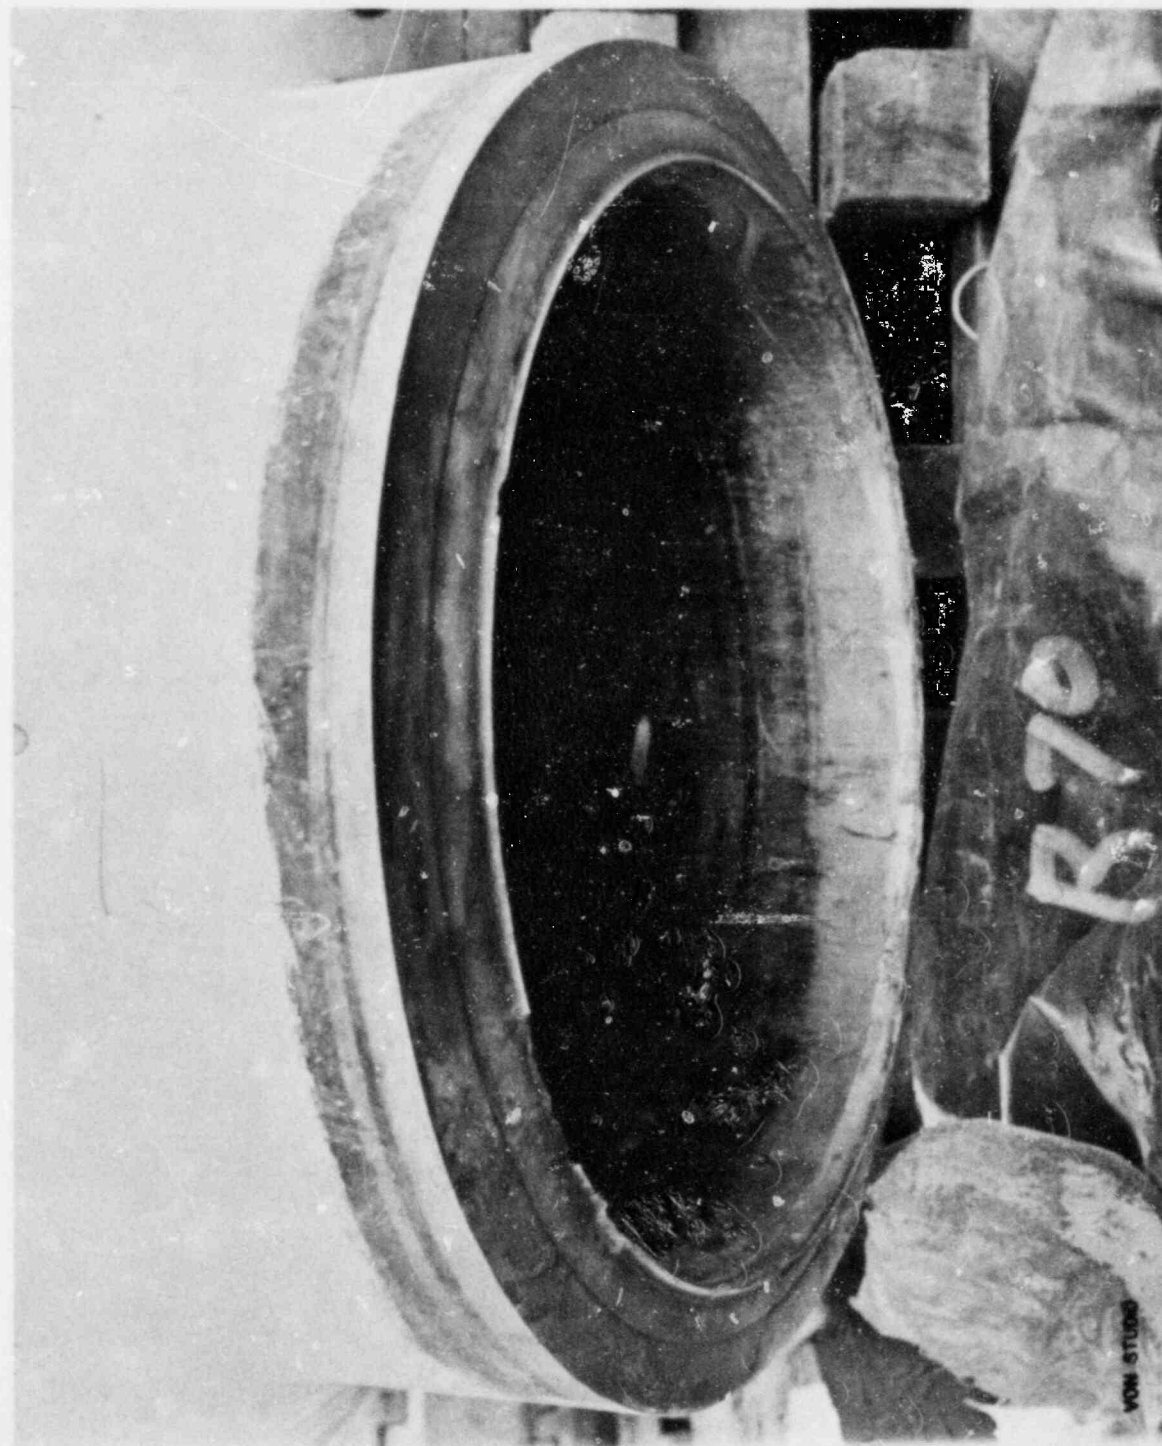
CLOSE-UP VIEW OF OUTLET NOZZLE ILLUSTRATING
